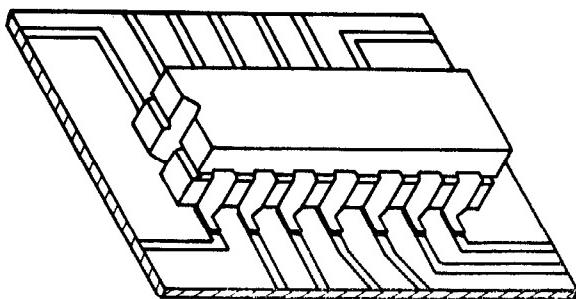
DUAL-IN-LINE PACKAGS — SURFACE MOUNTED
